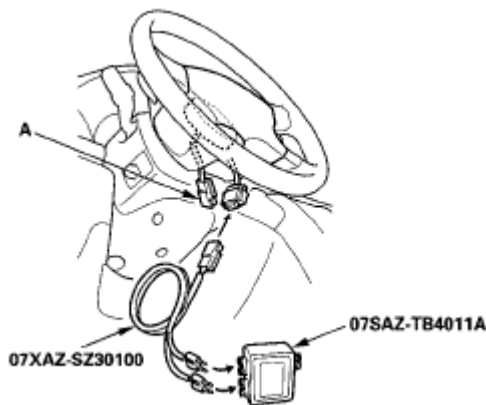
Identifying Driver's Airbag 4P Connector Of Cable Reel
